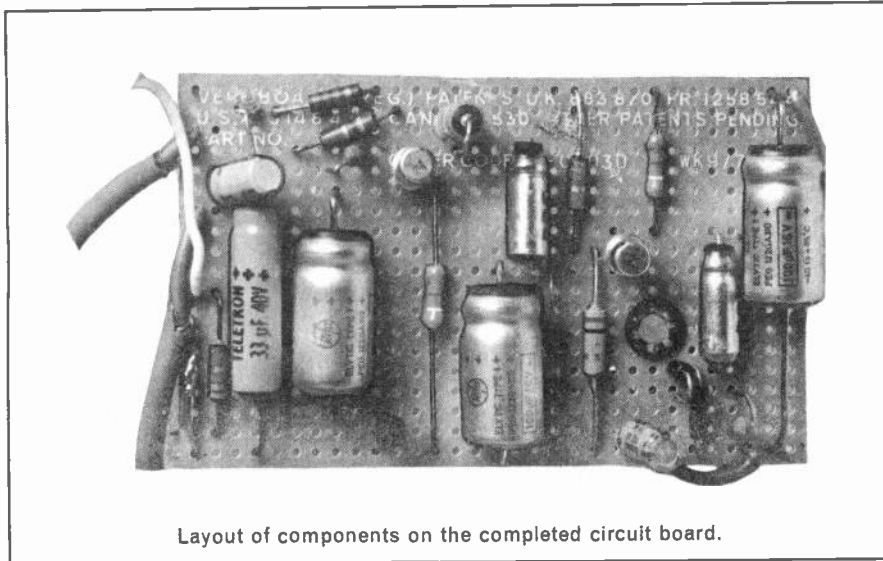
Shows the layout of the components on the topside of the stripboard. In the prototype no breaks in the copper strips were found necessary around the single fixing-hole. Also shows full interwiring between board and case mounted components.
